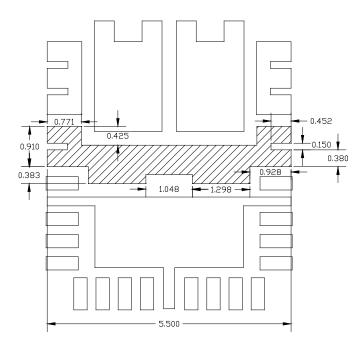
SMD Pad Sizes Detail 2 (Dimensions in mm)
